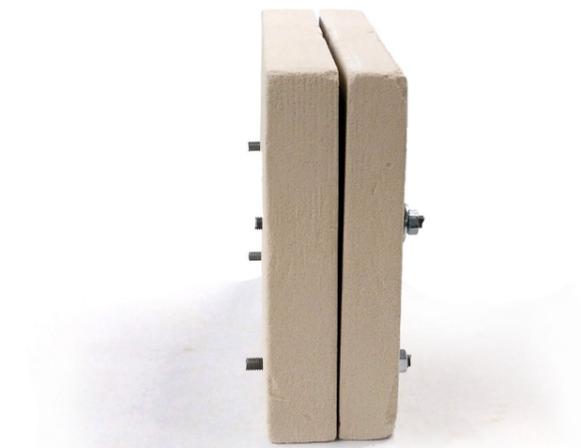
f: clamping of mould together using M8 bolt & nut
